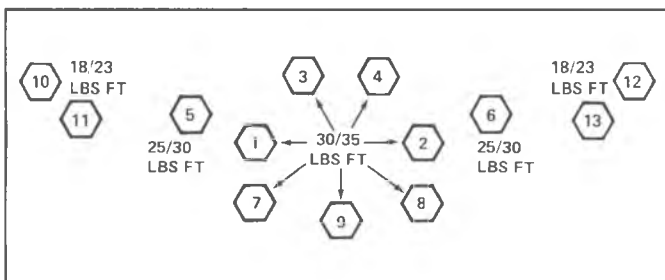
A--Exhaust Manifold to Cylinder Head Bolt Tightening Sequence and Torque
